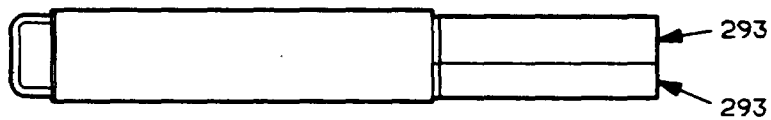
SHELTER ASSEMBLY (SHEET 23 OF 24)
